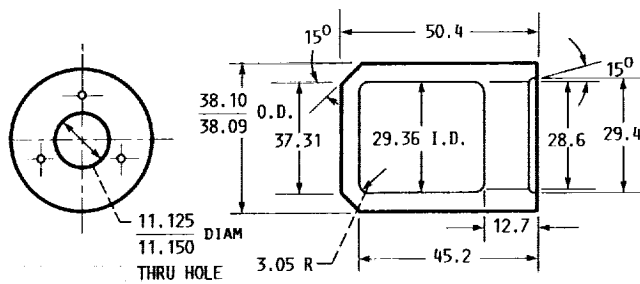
B. - JOURNAL FOR COMPLIANT GAS BEARING. MATERIAL, INCONEL 718. DIMENSIONS IN MILLIMETERS.
